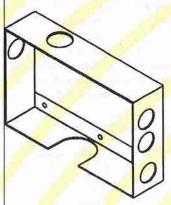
Model MB-P2 - Control Head Mounting Bracket.
